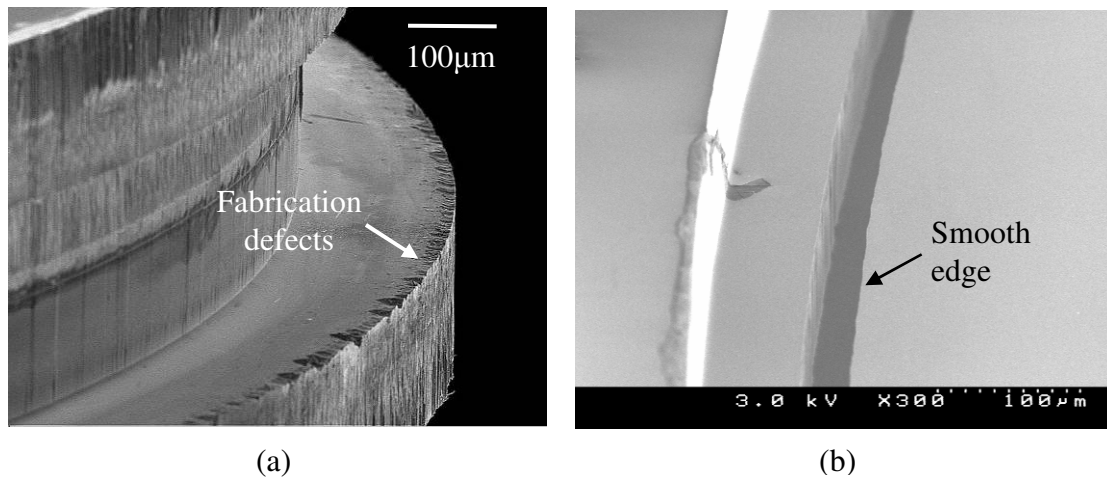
SEM images showing the planar bearing race fabricated with (a) the nested masking technique and (b) the spray coating technique.
